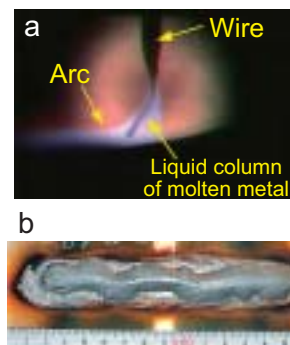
Results of MIG welding under pure Ar. (a) Behavior of arc and molten metal on the wire tip under pure Ar. (b) Appearance of weld bead.
